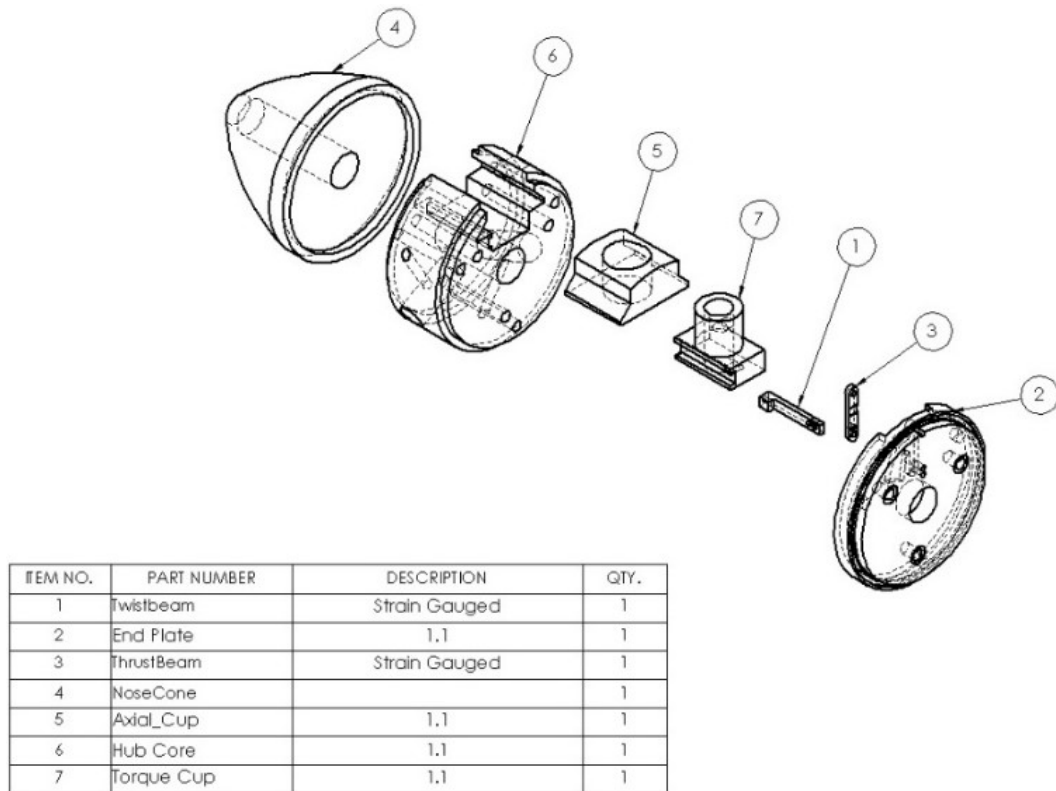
Instrumented Hub Assembly Drawing (Allmark, 2016)
